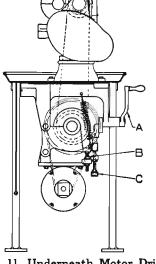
Underneath Motor Drive Arrangement for 10"-1" Collet Bench Lathes
